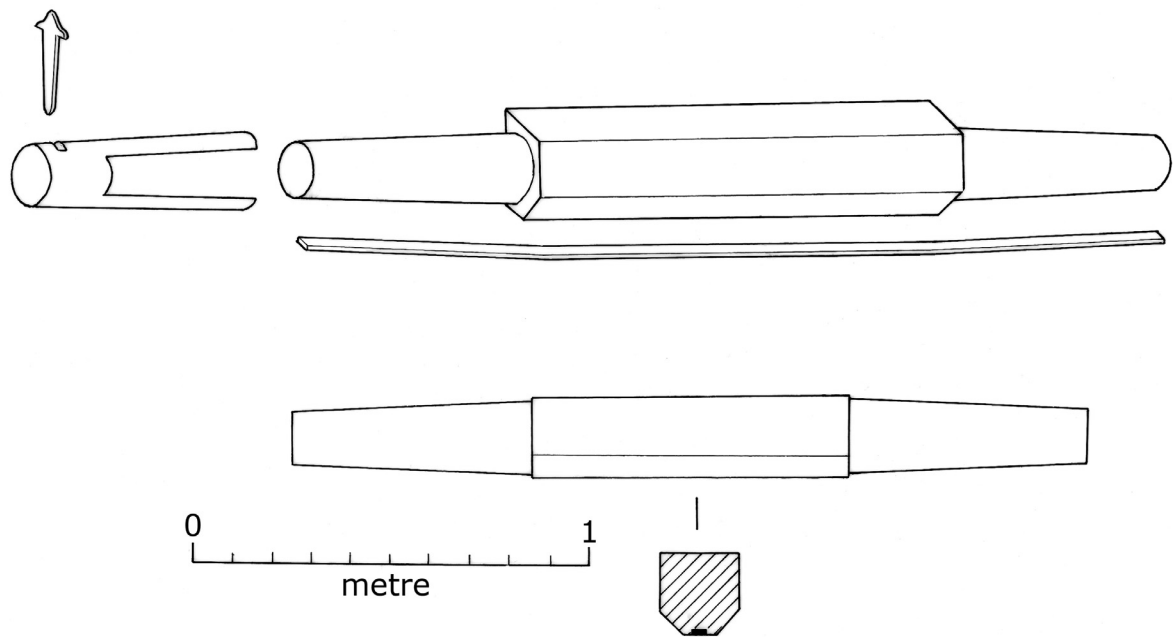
Main carriage axle (bottom) and exploded diagram of parts (top).
